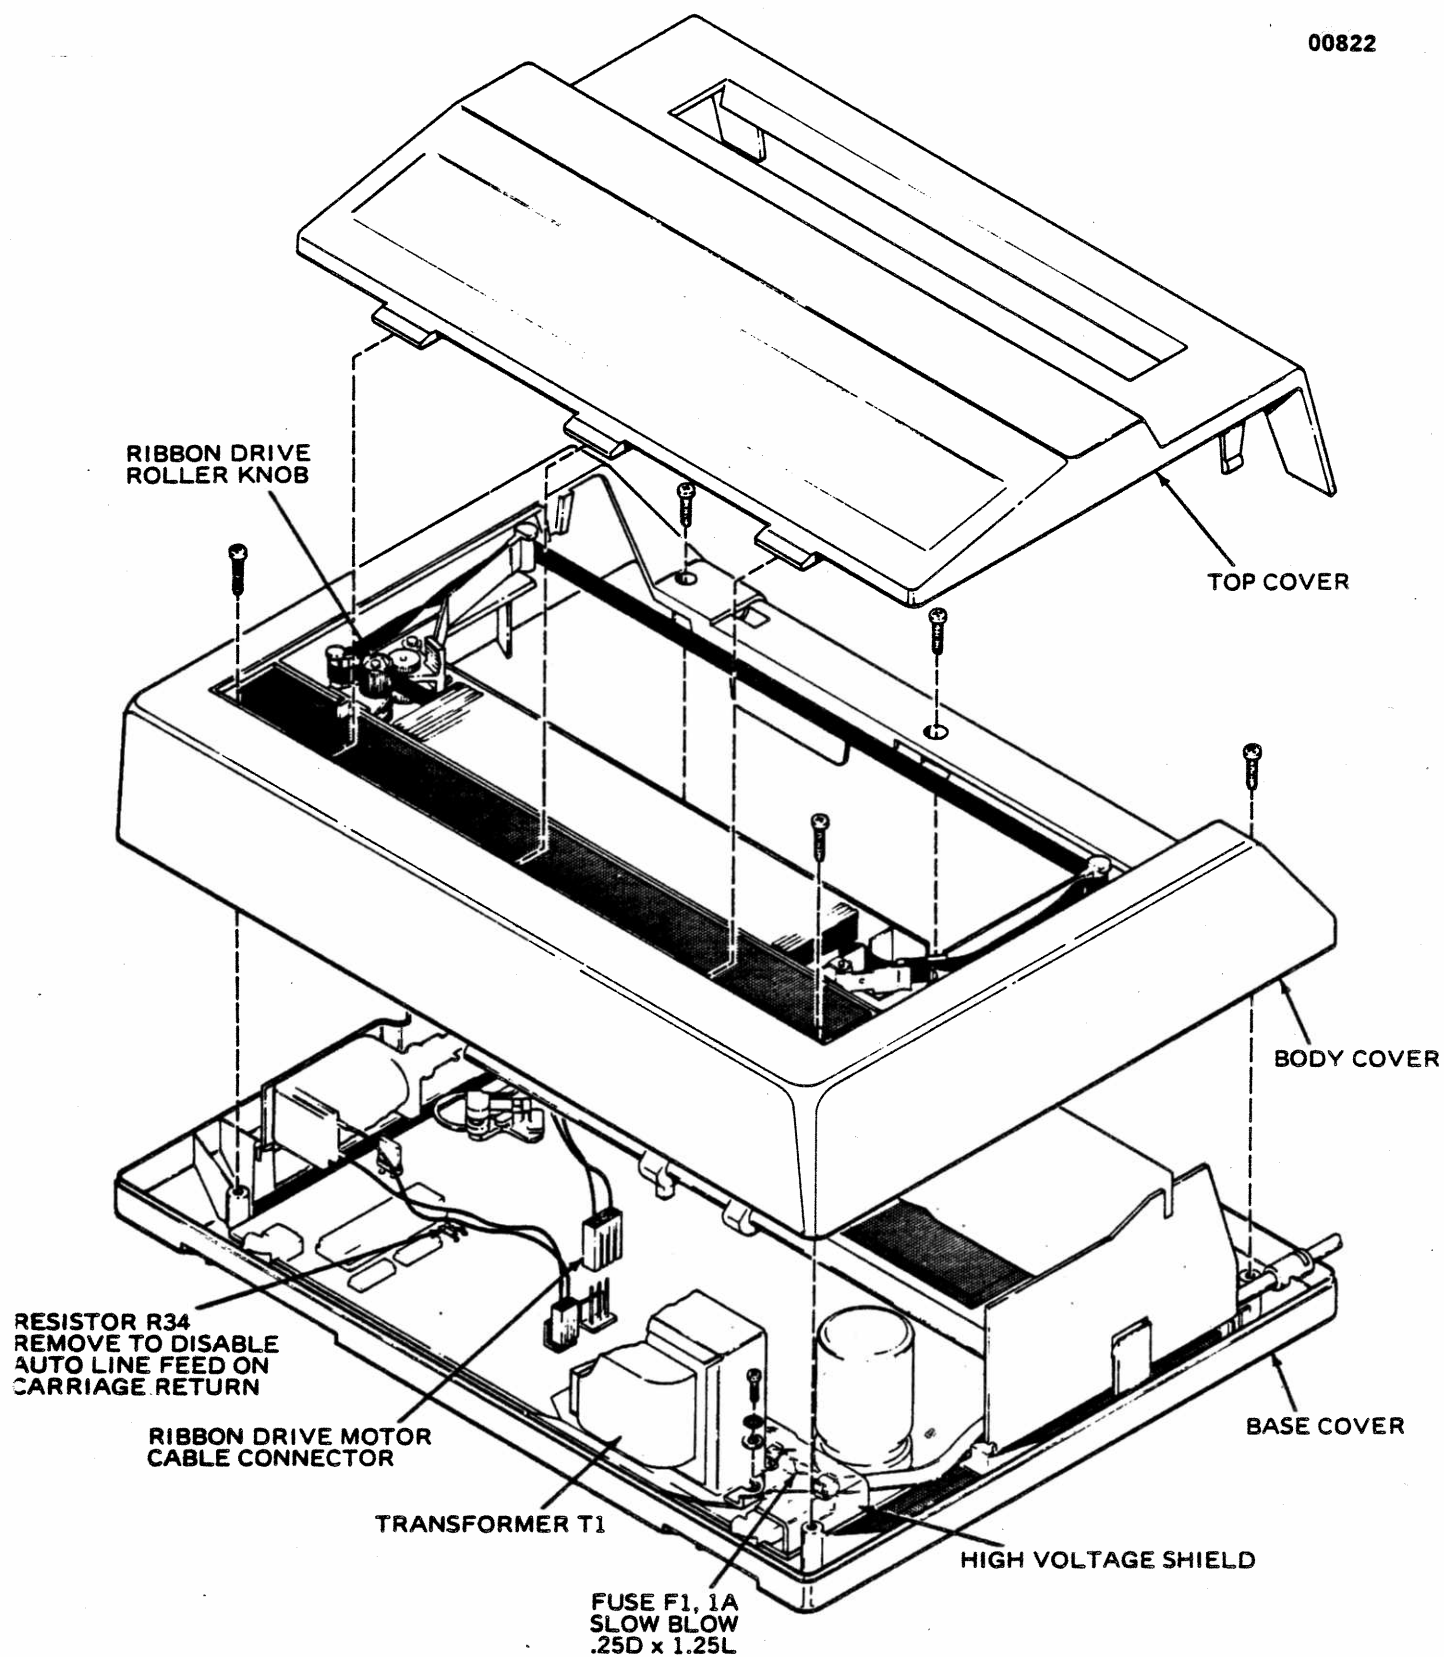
DISASSEMBLY OF PRINTER COVER ASSEMBLIES
